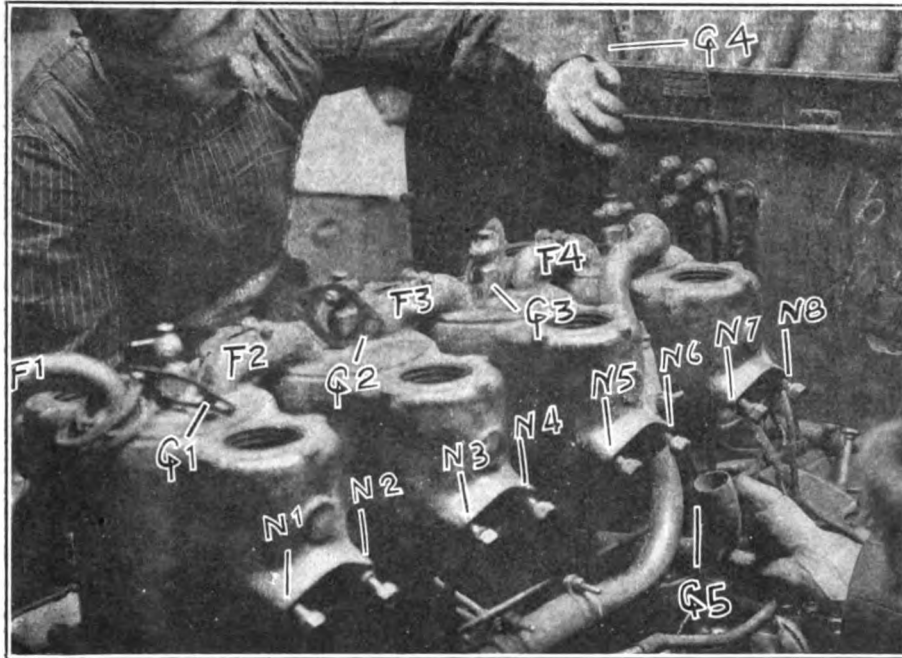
Testing timing of motor, and showing how all fittings should be placed where they belong
